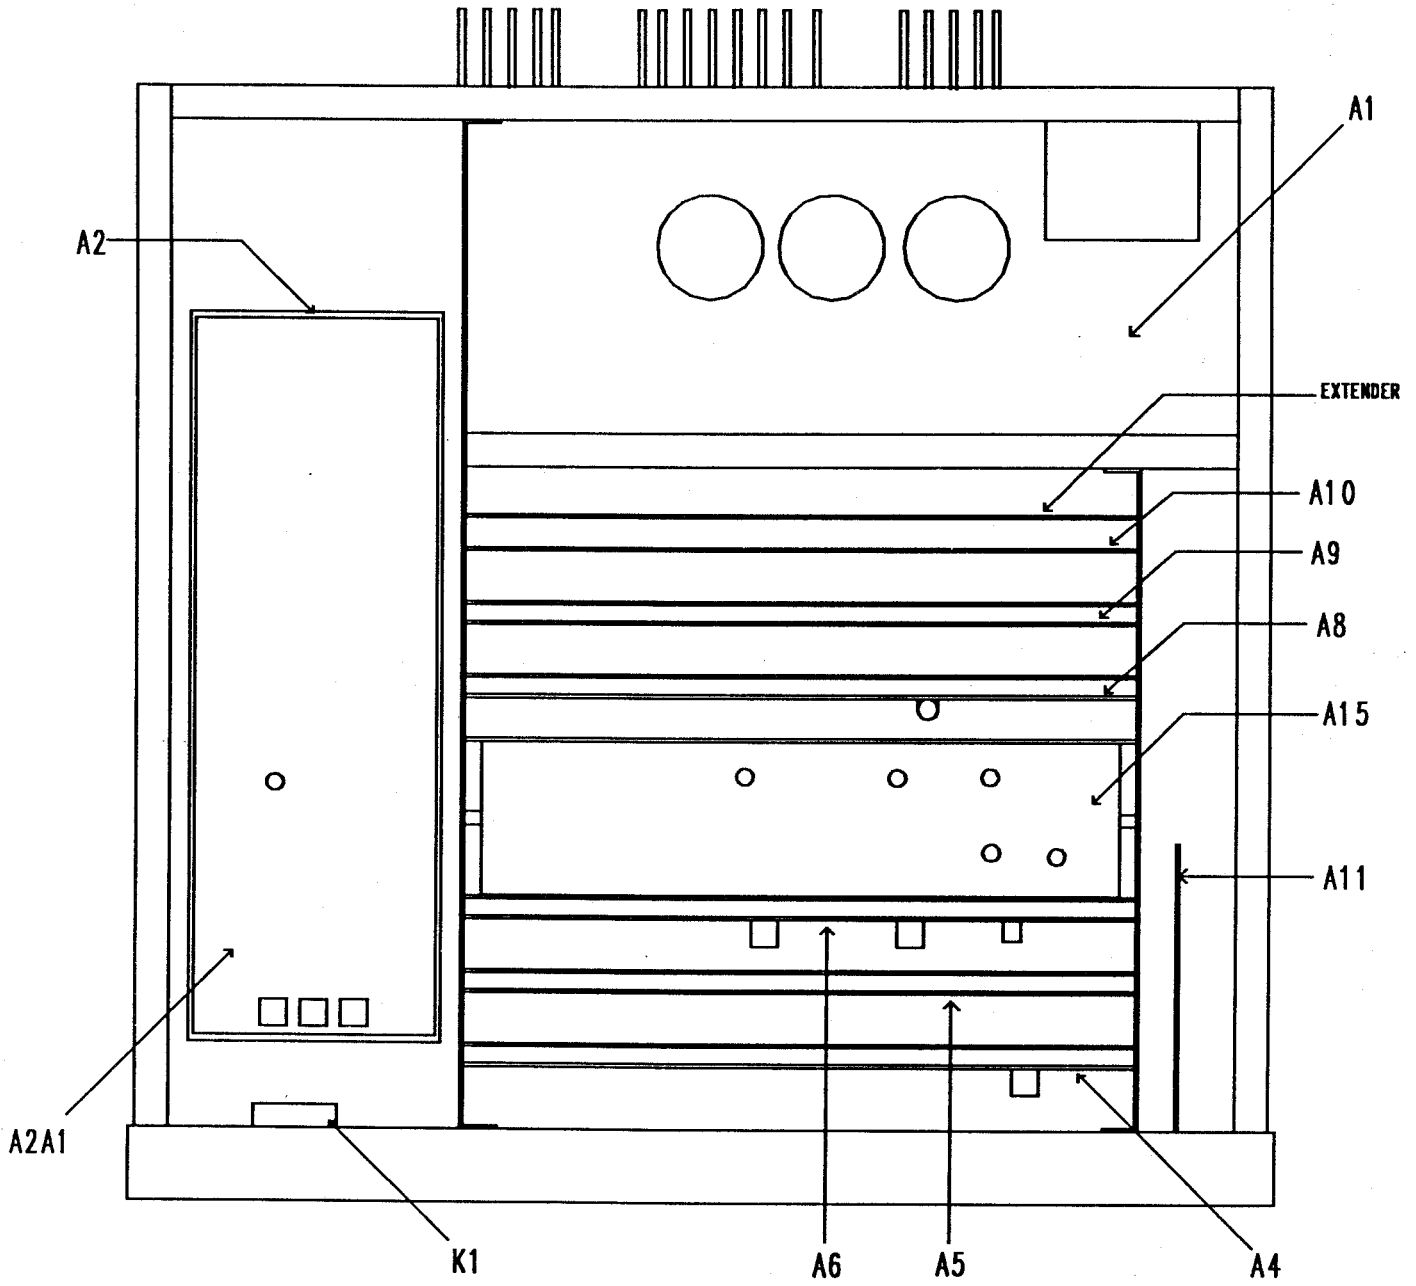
MAJOR ASSEMBLY LOCATION, TOP VIEW.
